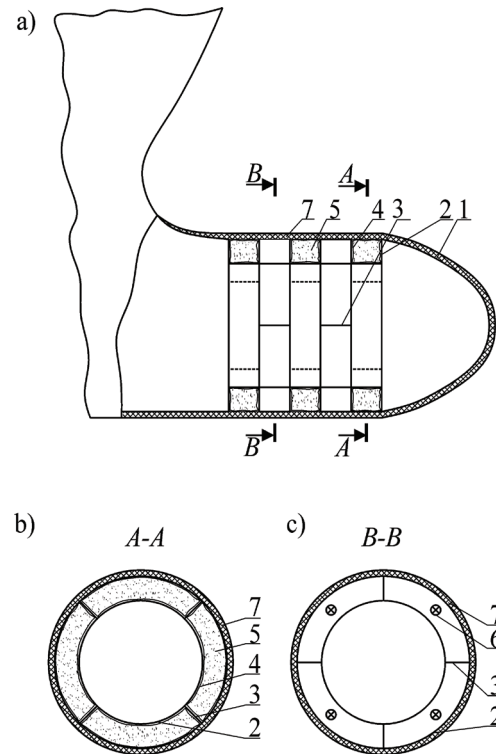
Scheme of a corrugated bulb with elastic containers: a) general view; b) section A-A; c) section B-B; 1- fairing; 2- corrugated insert; 3- brackets; 4- elastic containers; 5- working medium; 6- pressure relief devices; 7- shell
